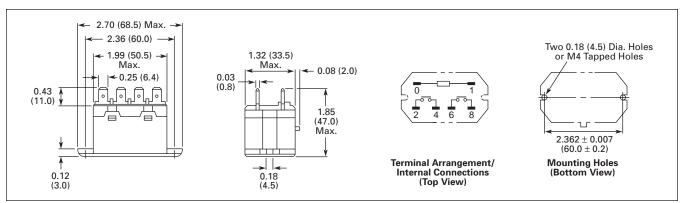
D8PR7TF — Approximate Dimensions in Inches (mm)
